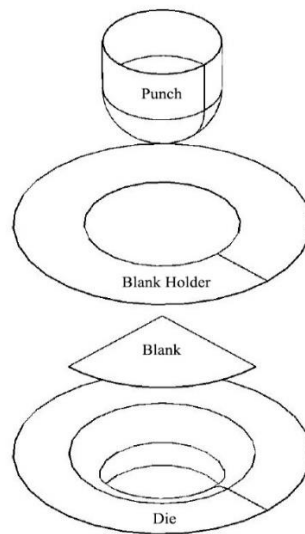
Disassembly view of die components to simulate the deep drawing process of the experimental sample
